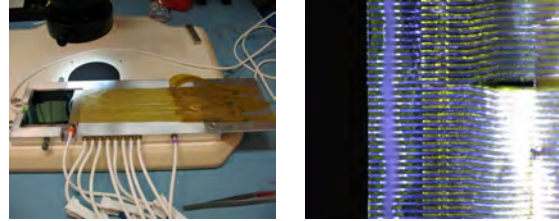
Special tooling for the assembly of DSSD and the cable (left); encapsulated signal pads (right).
